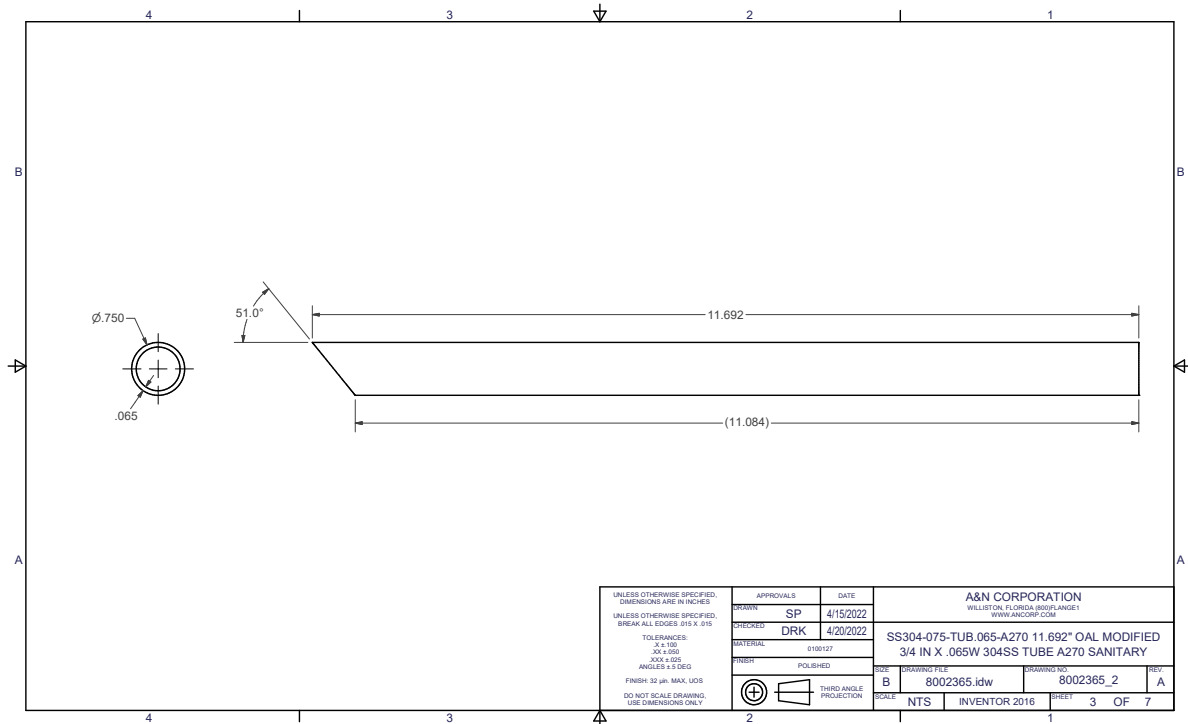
ANCORP Drawing 8002365 Rev A, Page 3
